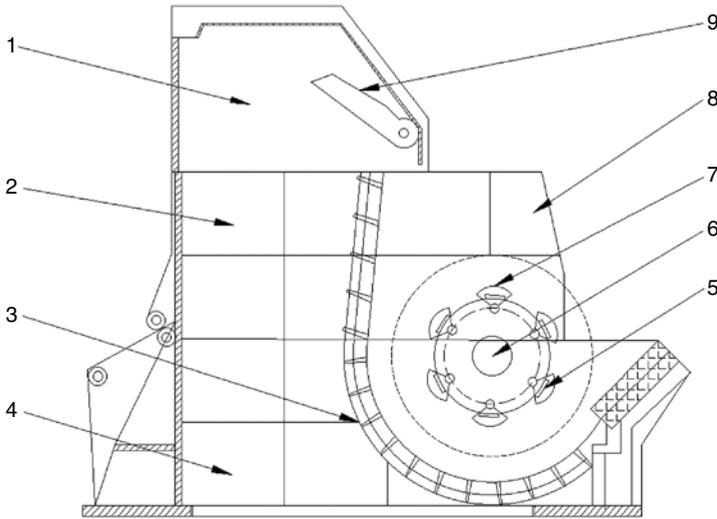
Horizontal hammer mill. 1 – Upper cover body; 2 – upper box; 3 – sieve plate; 4 – lower box body; 5 – anvil iron; 6 – spindle roller; 7 – hammer head; 8 – lining board; 9 – upper discharge door.
